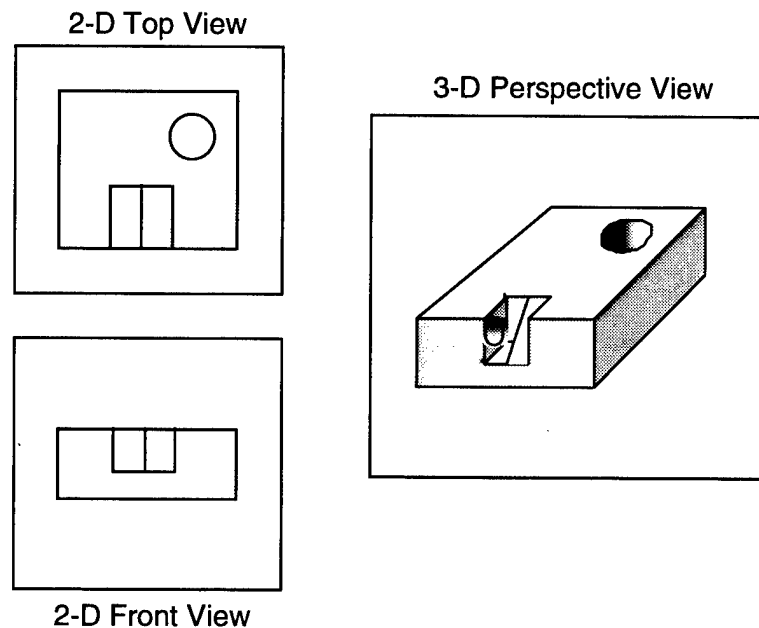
Top view, front view, and perspective view of block with cutouts and pockets.
